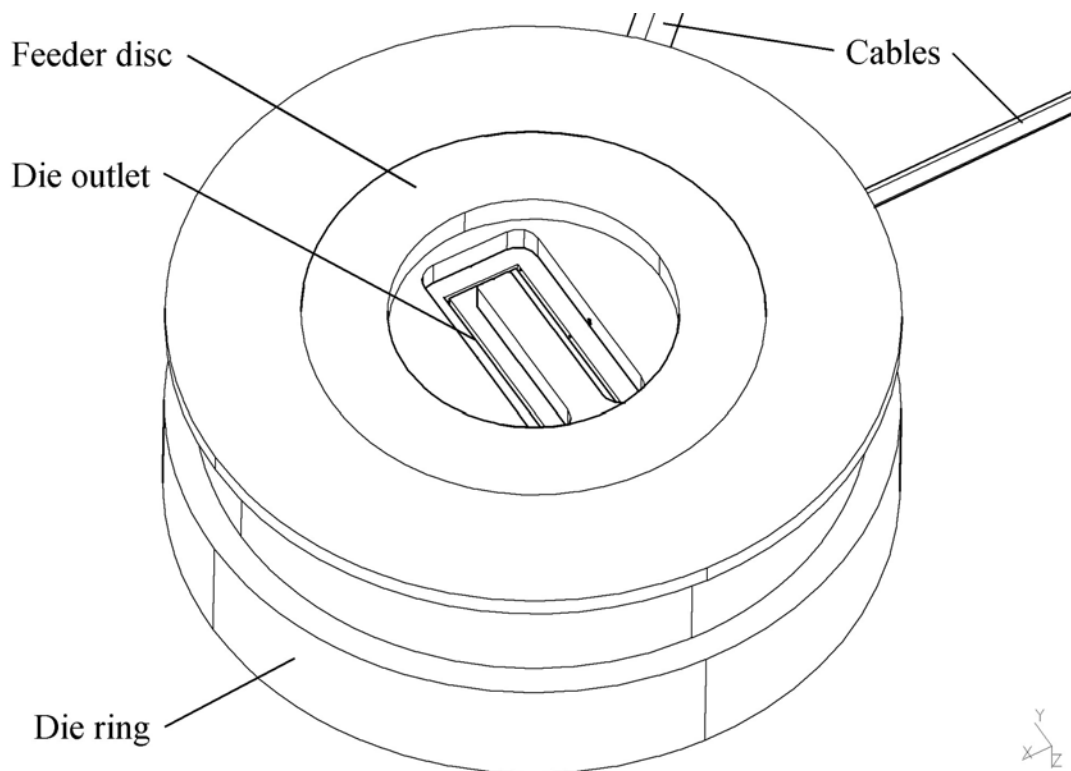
A top view of the tool stack used for industrial extrusion of a U-profile with a thickness of 2.3 mm, a height of 120 mm and width 49.5 mm.
